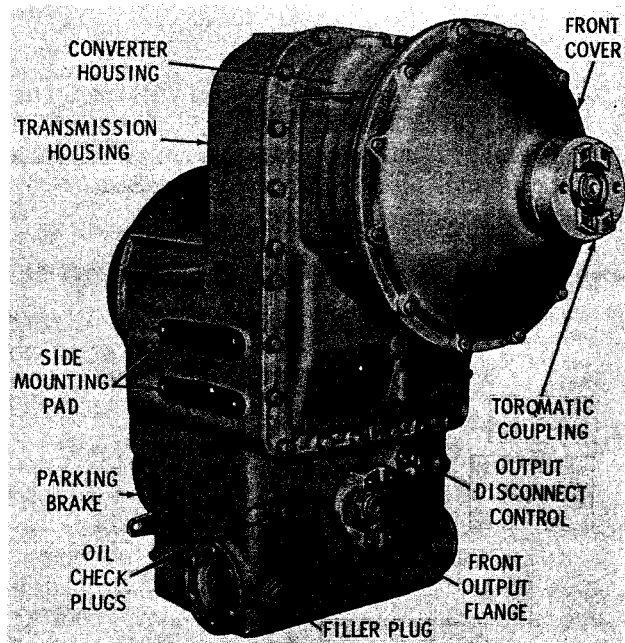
Model TT 2221-1 (or TT 2421-1) transmission equipped for remote-mount installation—right-front view
